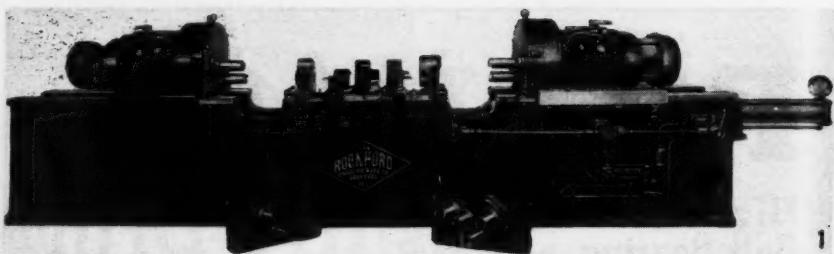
Rockford Double-End Horizontal Drilling Machine Set Up for Drilling Crankcases
